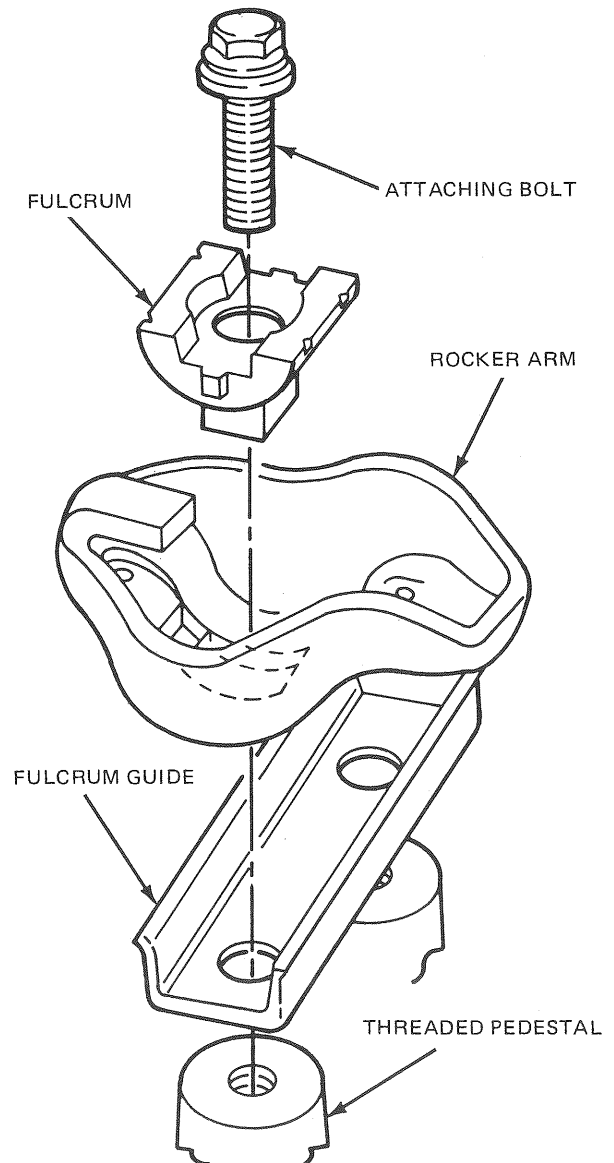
A Valve Rocker Arm Assembly (Stamped)
